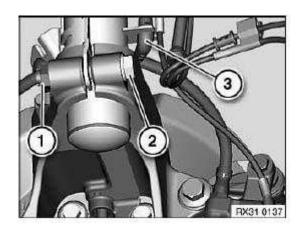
Identifying Nut, Pulse Generator And Screw Courtesy of BMW OF NORTH AMERICA, INC.
